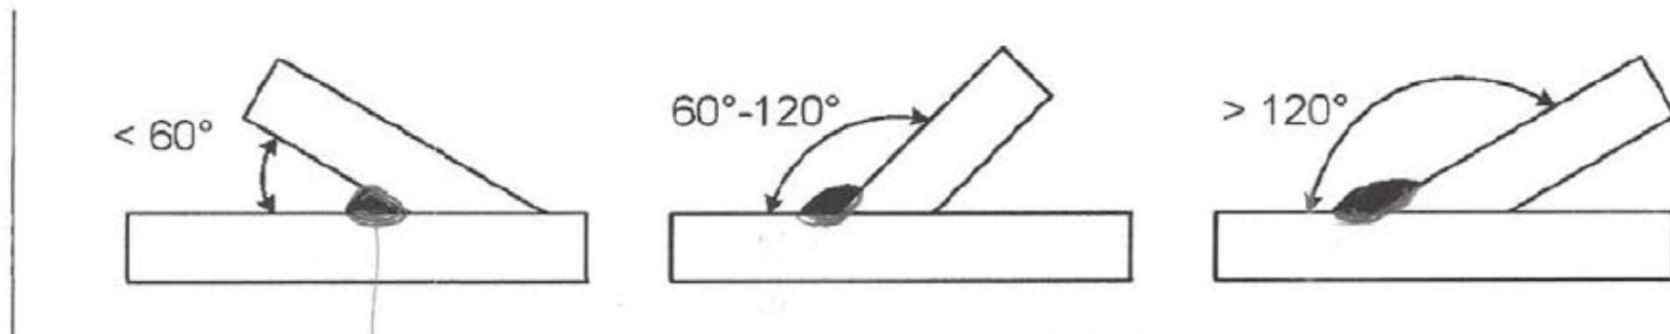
Angle between attached plates Ed. Show the fusion line, welds in grey
